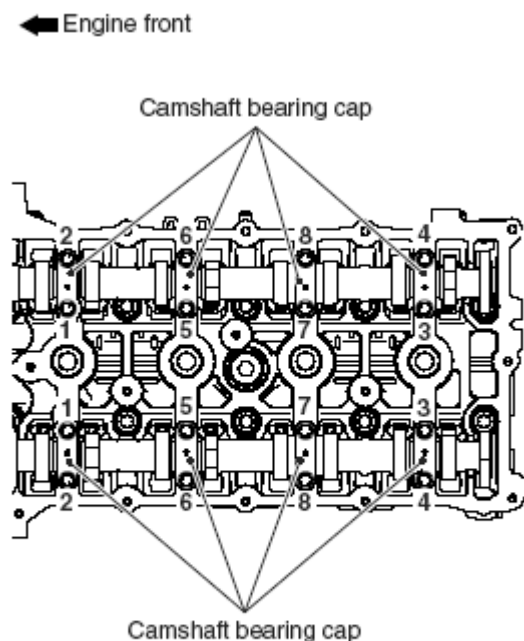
Identifying Front Camshaft Bearing Cap Bolts Numerical Order
